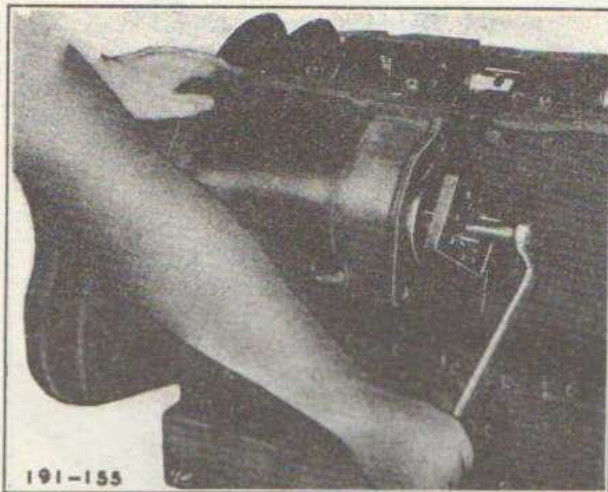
View Showing Puller Applied to Accessory Driveshaft
